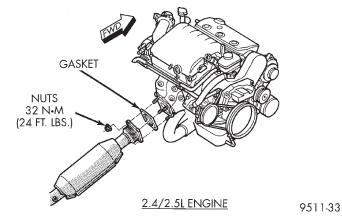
Exhaust Pipe Mounting To Exhaust Manifold CAUTION: Do not apply a 12-volt power source to any terminals of the 25 HCU connector when disconnected from the CAB.
